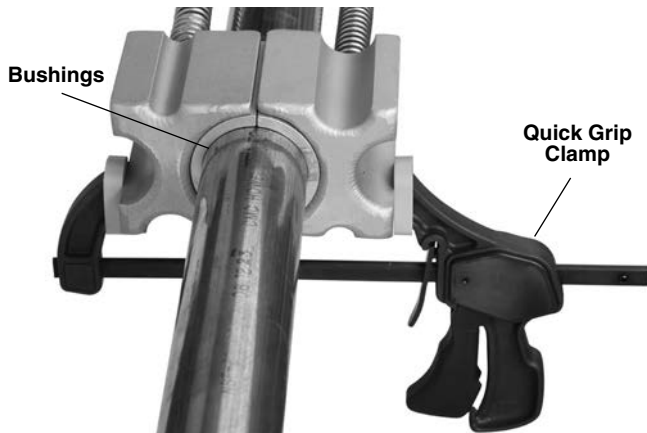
Attaching Freeze Heads Using Quick Grip Clamp
